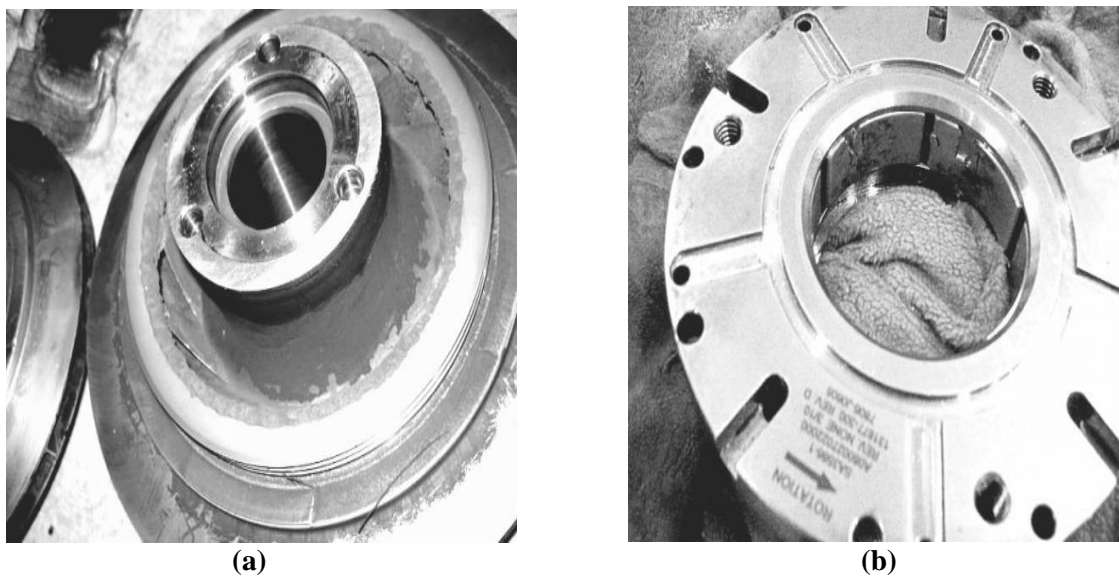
26: Internal Inspection Findings: (a) Thin Layer of Deposits on the First Impeller (b) Bearings in Good Conditions
